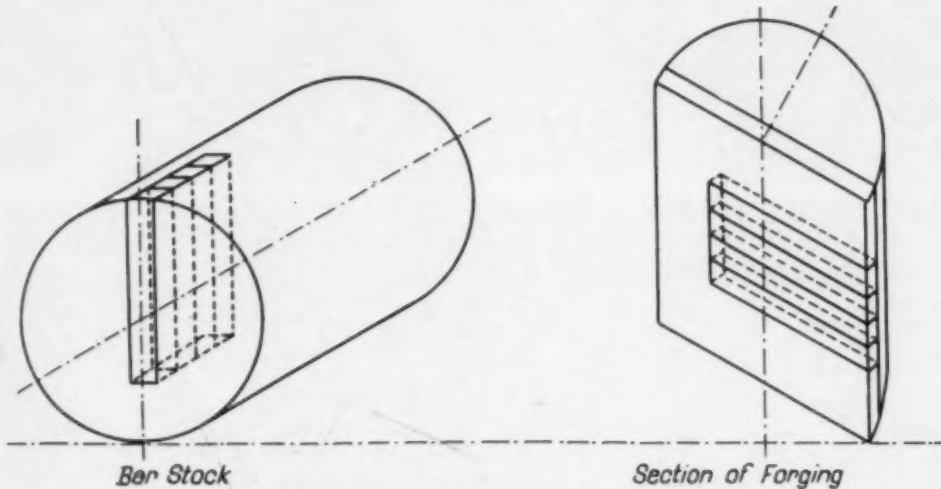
Sketch Showing Method of Taking Impact Tests.
